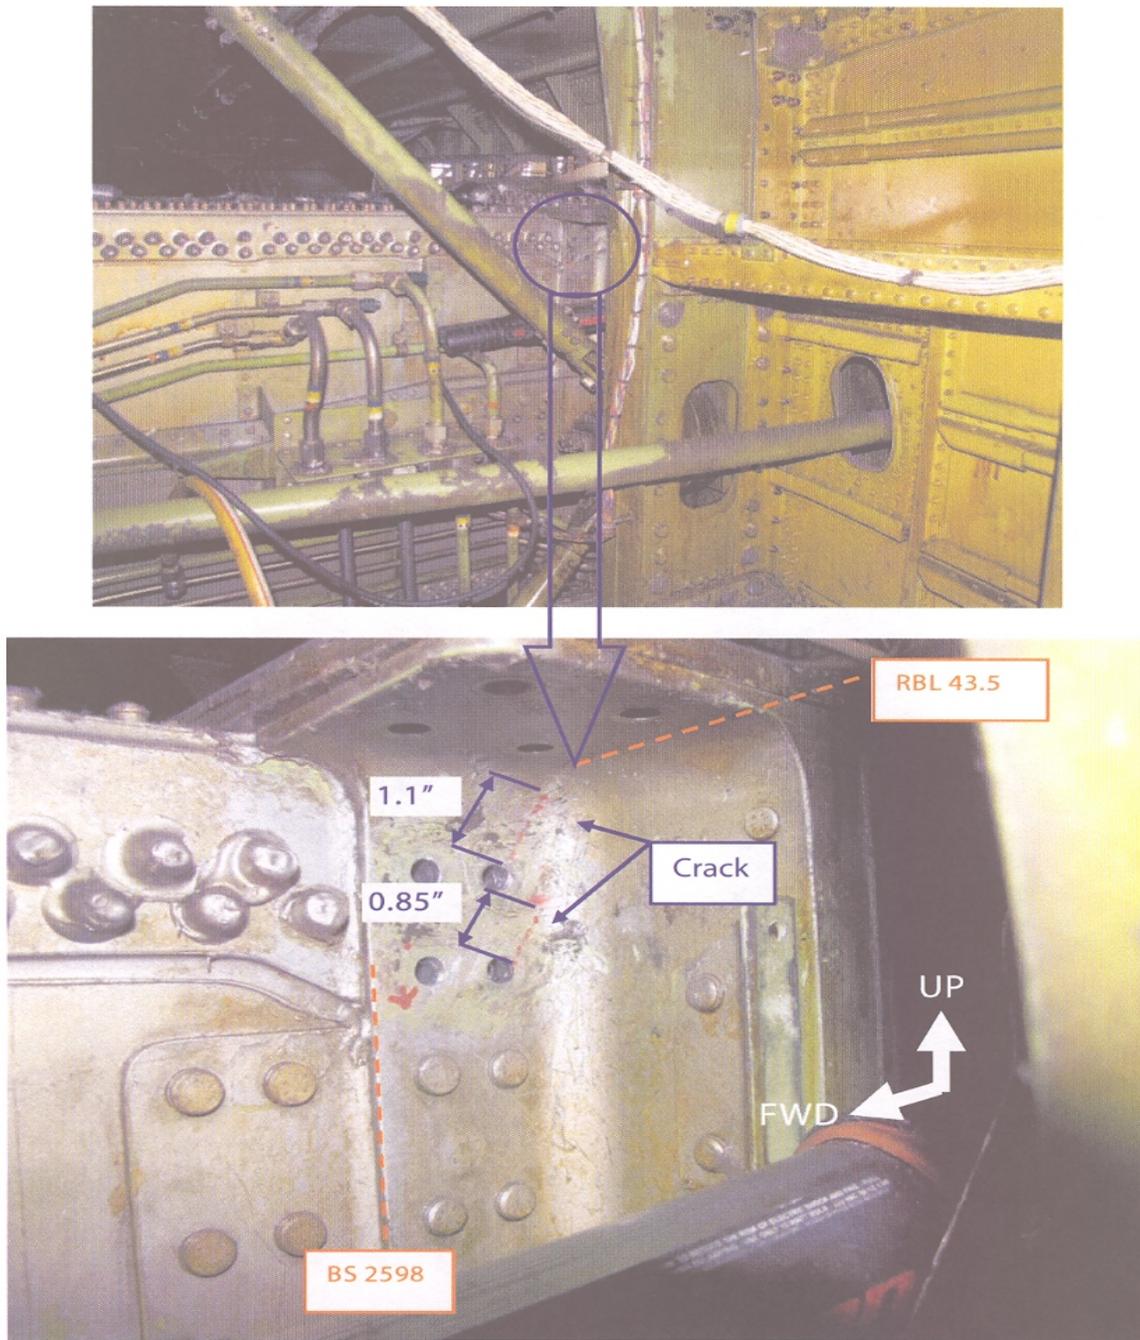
Figure B. RH Horizontal Stabilizers Hinge Fittings Crack
